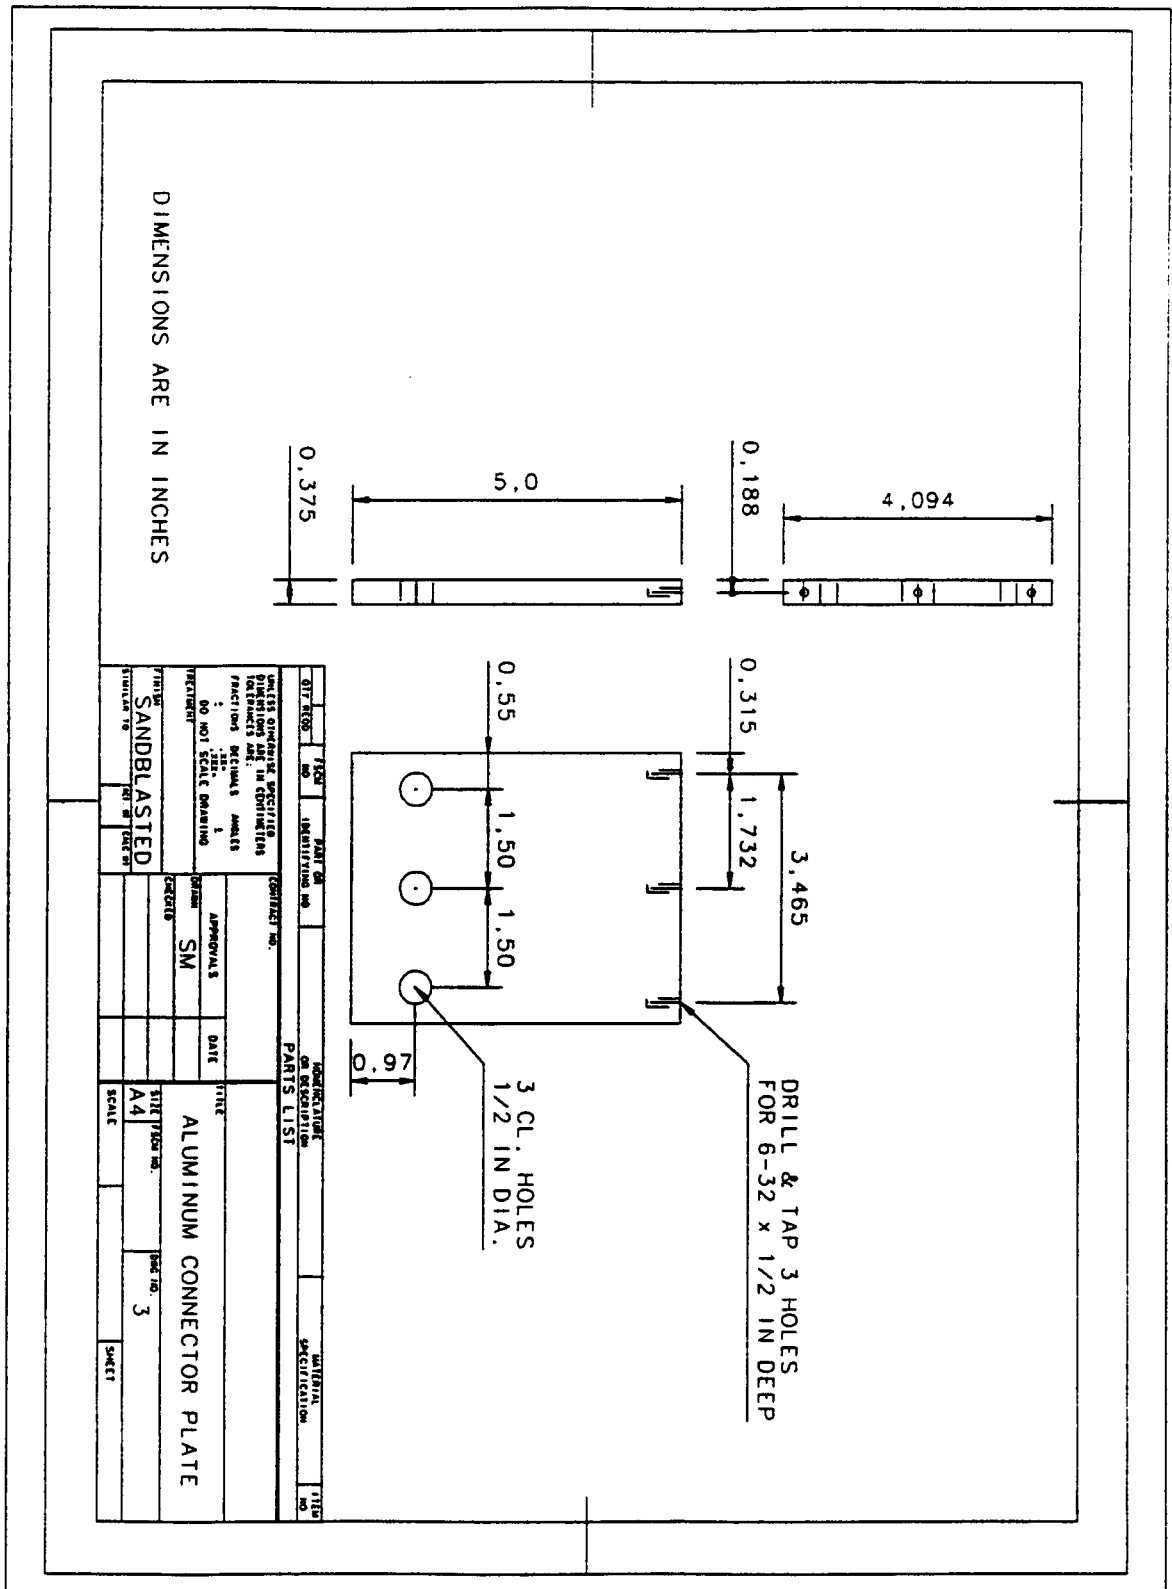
Aluminum plate which connects the cart to the coil assembly
